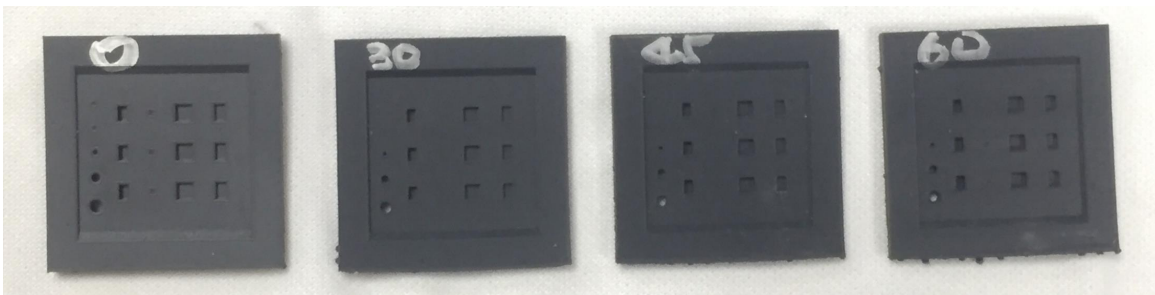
The fabricated prototypes of the test samples for 3D printing material, Flexible FLGR02 under different printing tilt angles.
